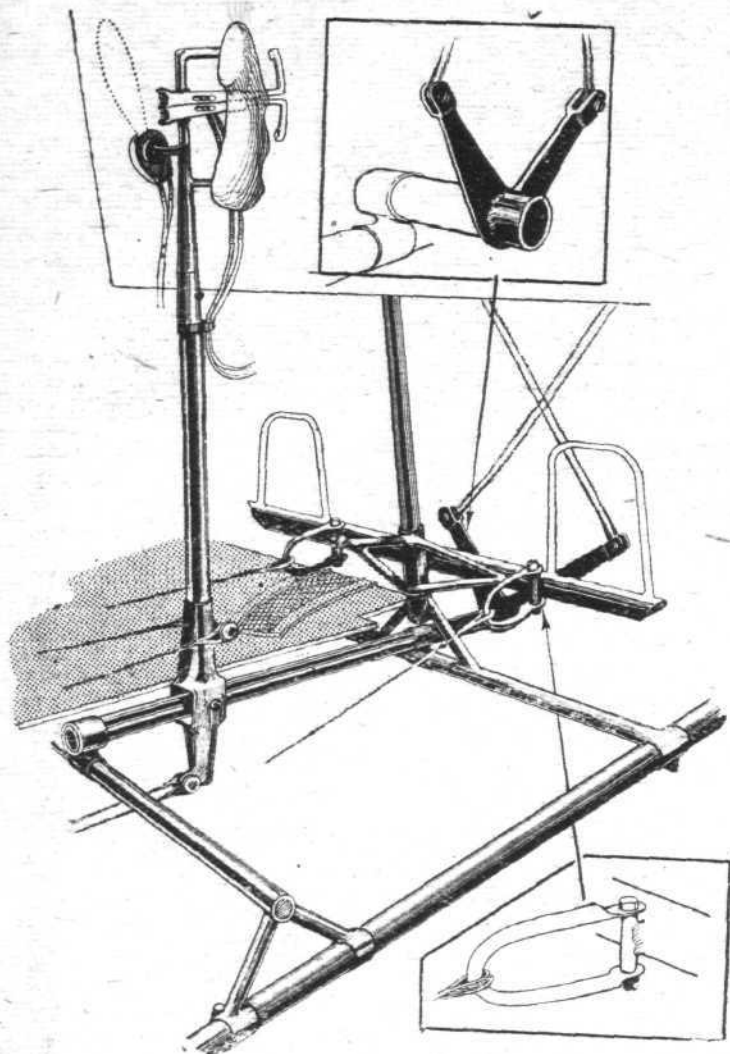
Sketch showing controls of Fokker biplane. The insets show the aileron control crank arms and the rudder cable shackles respectively.
